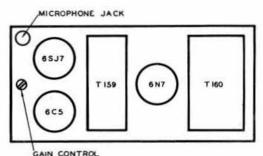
Component layout diagram (not to scale). With the transformers specified, a chassis, size $3\frac{1}{4}$ in x $7\frac{1}{4}$ x $2\frac{1}{4}$ in, will fit most B2 spares boxes. The actual layout adopted will depend on chassis dimensions.
